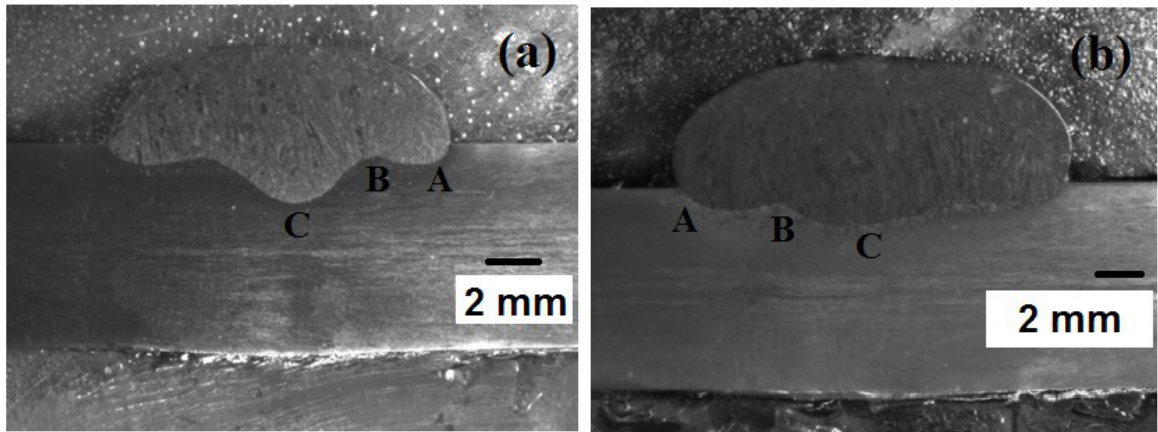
Macrographs of the welded samples. (a) 1.5 kJ/mm, (b) 2.5 kJ/mm.
